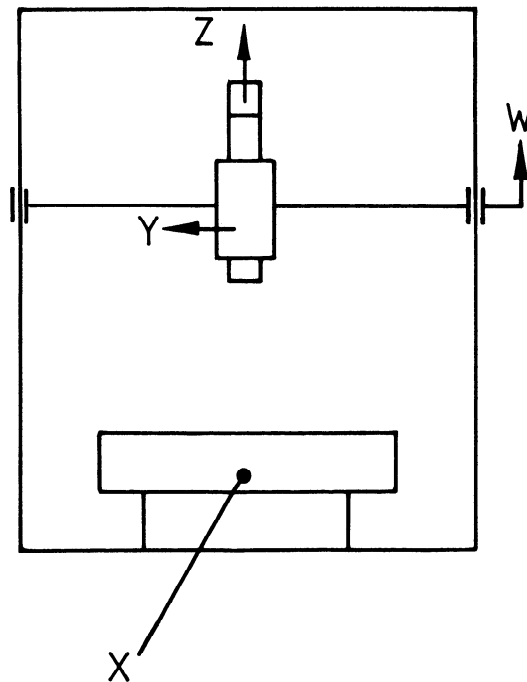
Type 3: Machine with one milling head on the cross-rail
